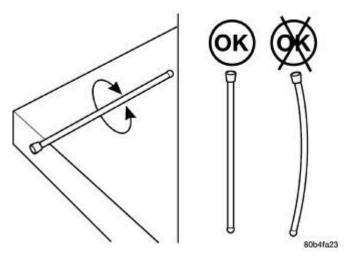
Inspecting Push Rod For Flatness Courtesy of CHRYSLER GROUP, LLC
